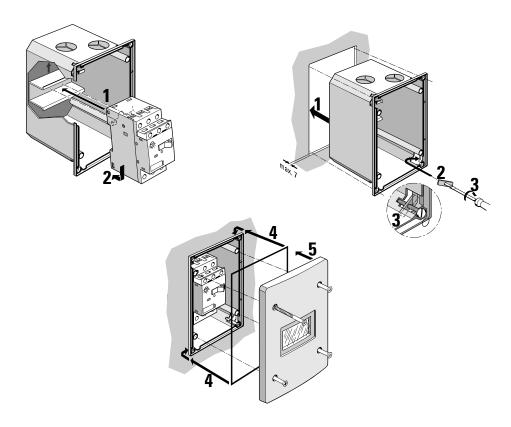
Molded plastic flush mount enclosure (example: frame size S00)
